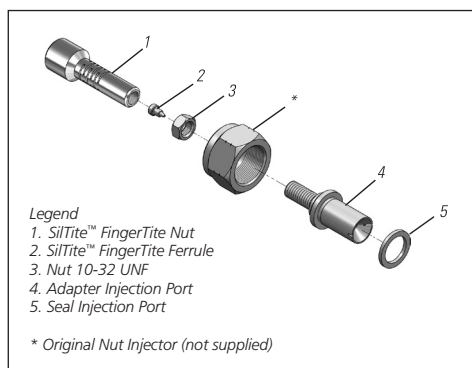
Exploded diagram of the injection port SilTite™ FingerTite assembly.
